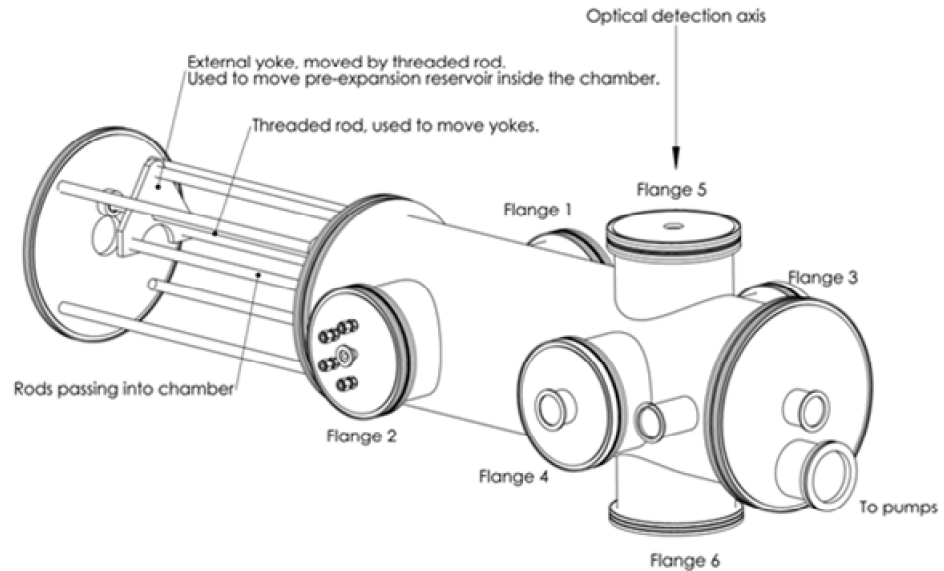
The main Laval nozzle chamber showing the positions of the access flanges (7) drawn by A Goddard.
